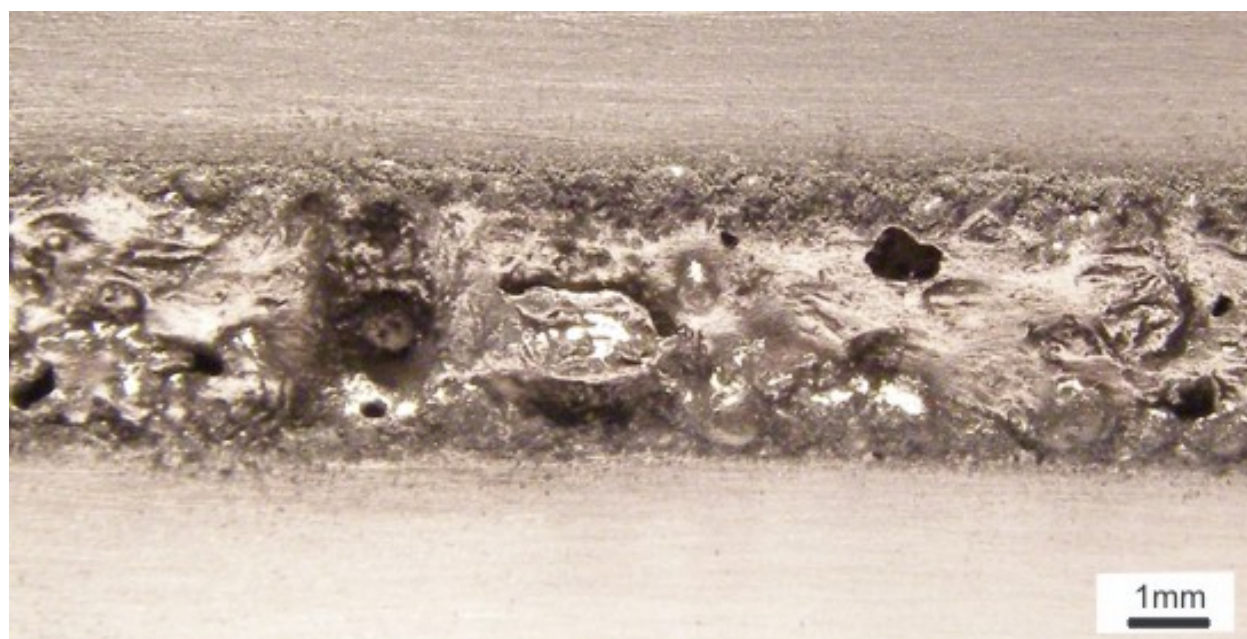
View of the MCMgAl9Zn1 casting magnesium alloy face of weld after laser treatment with WC, scan rate: 1.0 m/min, laser power: 2.0 kW
